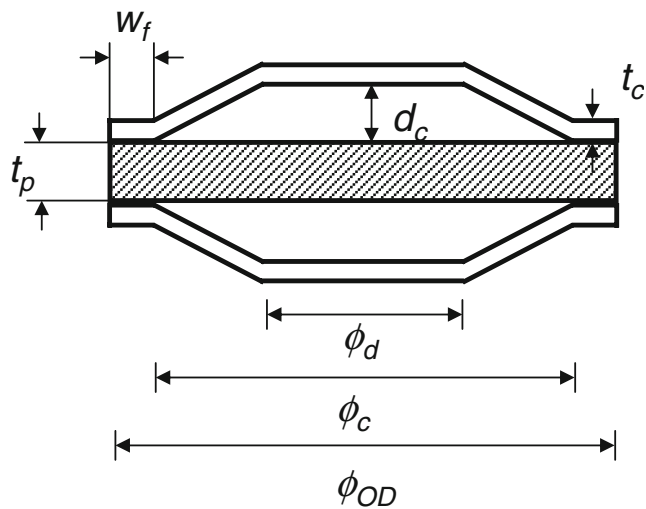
Cross-section view of a cymbal and a wagon wheel device marked with the various dimensional parameters. For clarification of the dimensions refer to Table 1
